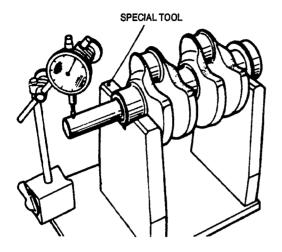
MEASURING CRANKSHAFT RUNOUT
